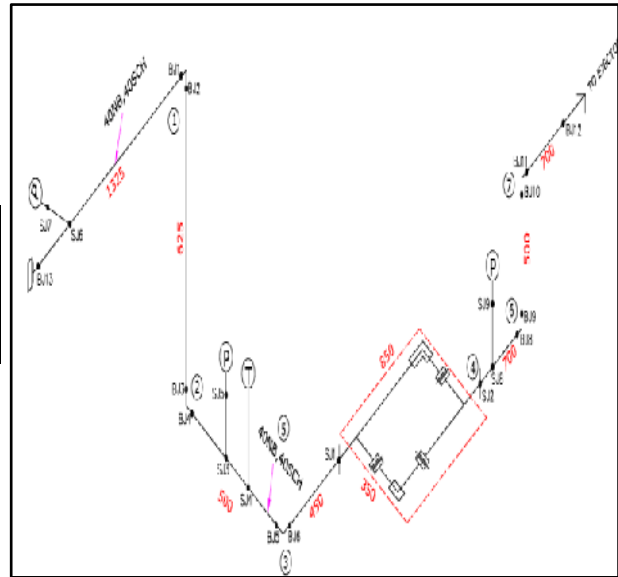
clearly shows the Turbine outlet circuit was drawn in Auto-cad software package, its main function is to let out the cryo fluid from the turbine through the outlet circuit.. This circuit carries two elbows with two socket joints and four butt joints, here expander and reducer plays a vital role and its functions are measured in the Segment-1. Generally the turbine drives the pump. From Table.4 gives the exact dimension.
